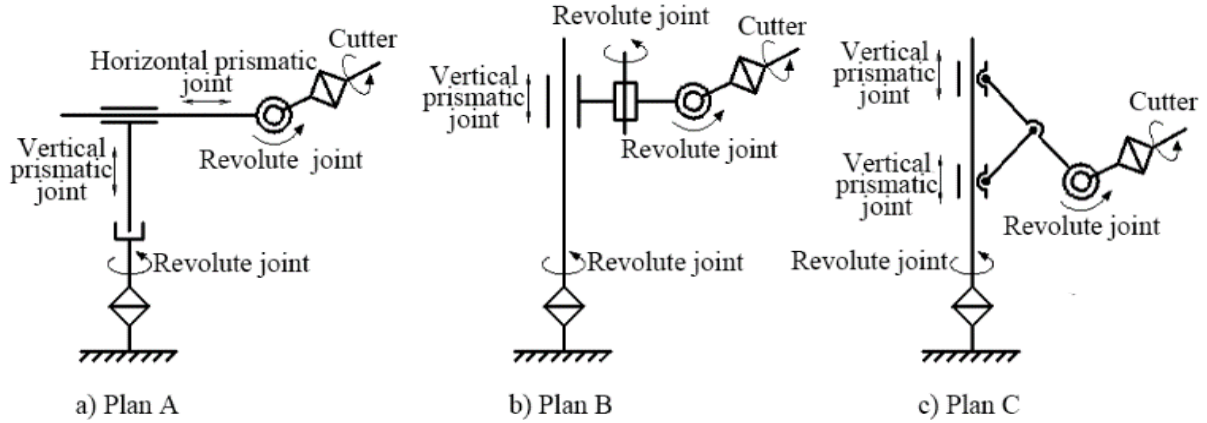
Schematic diagram of feed mechanism of the groove-tracking milling machine.
